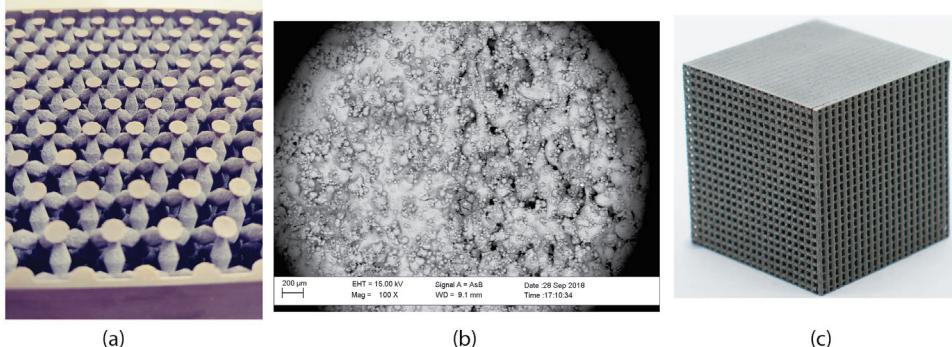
Examples of AM for phononic crystals and acoustic metamaterials. a: Acoustic metamaterial that may enable acoustic cloaking, fabricated from titanium using a laser powder bed fusion (LPBF) technique known as direct metal sintering. Reproduced from Cushing (2022), with permission from the AIP. b: Acoustic metal foam with prescribed porosity enabled by metal LPBF. Reproduced from Konarski (2021), with permission from the AIP. c: AM acoustic “filter” that can be used to improve nondestructive evaluation measurements. Reproduced from Smith and Matlack (2021), with permission from the AIP.
